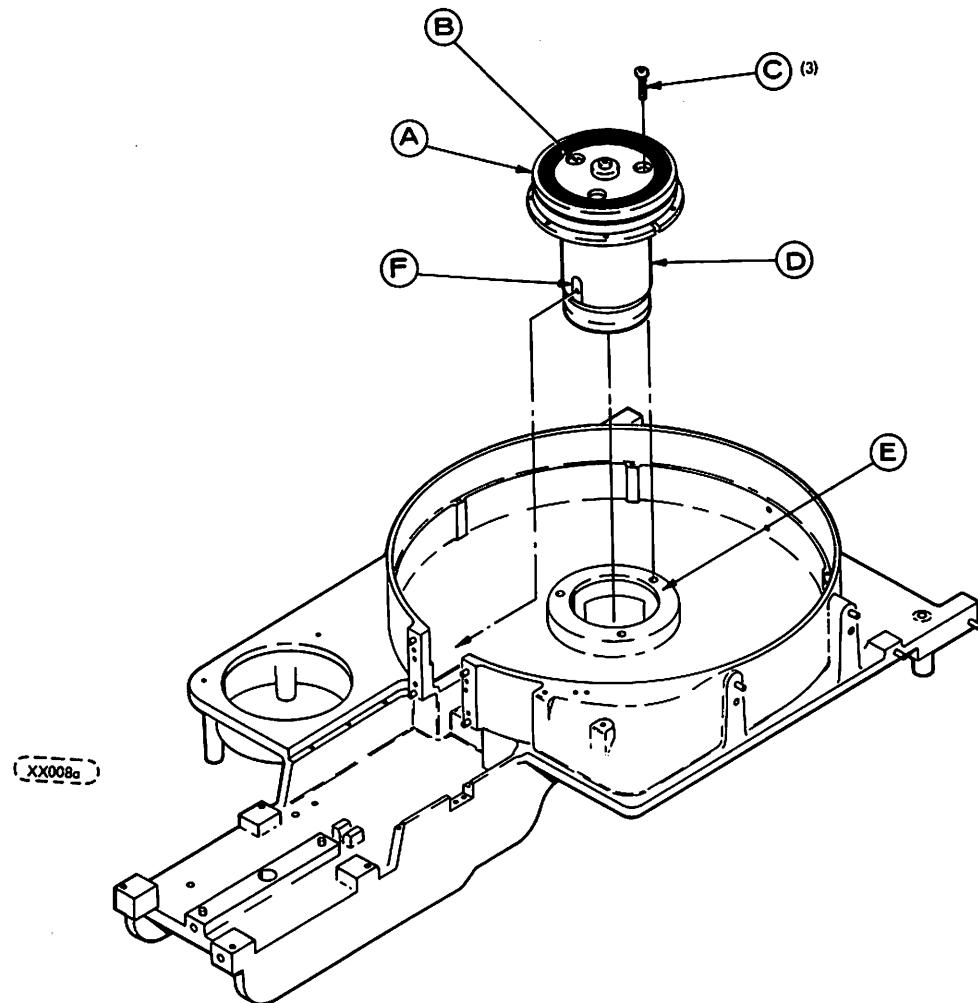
SPINDLE REMOVAL AND REPLACEMENT
